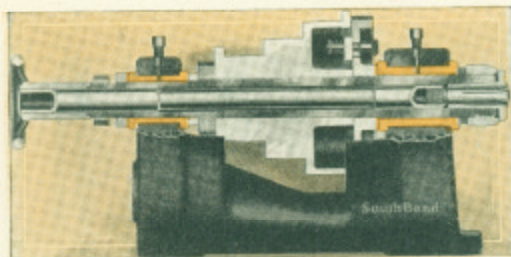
Cross Section View of Lathe Headstock Showing Application of Draw-in Collet Chuck
